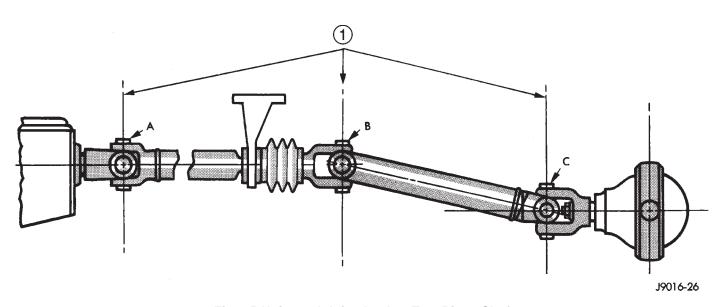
Universal Joint Angle—Two-Piece Shaft
